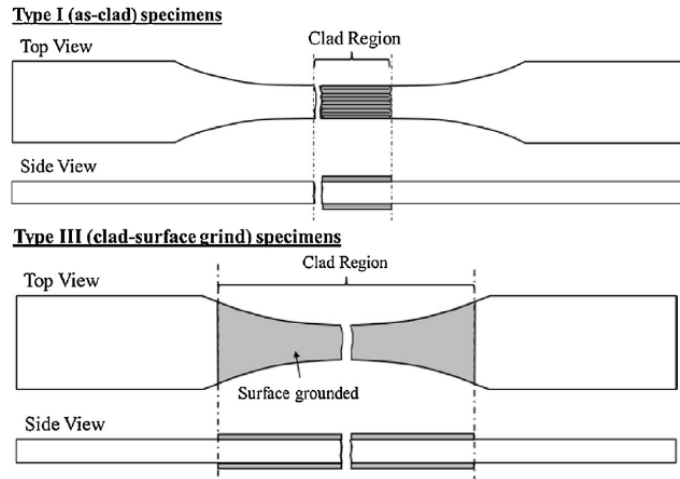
Top fatigue specimen with laser deposition "as-clad"; bottom, specimen with extended clad surface and rectified outer surface (Chew et al., 2017).
